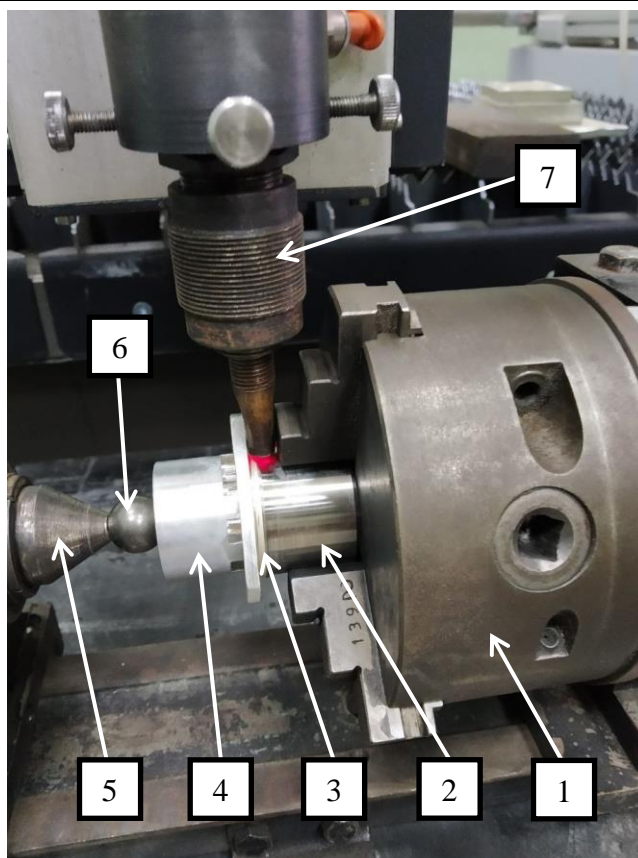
The process of laser welding according to the scheme “cover and flange with flanging”, where 1 – clamping chuck, 2 – sensor part housing, 3 – welded joint, 4 – aluminum spacer, 5 – tailstock, 7 – metal ball, 6 – laser welding head
